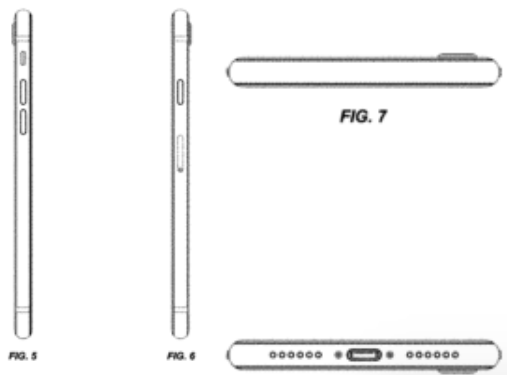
The picture to the left is a left side view thereof and the following is a right-side view thereof. The picture on top to the right is a top view thereof and the picture on bottom is a bottom view thereof [11].
